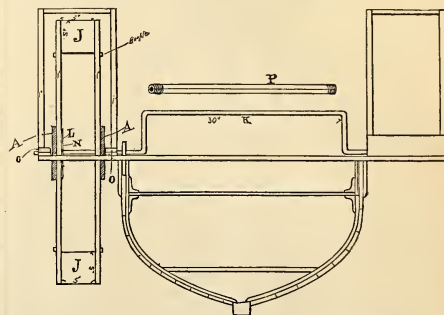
SHOWING ON THE LEFT-HAND SIDE A SECTION OF THE WHEEL IN PADDLE-BOX, AND ON THE OTHER SIDE THE PADDLE-BOX WITHOUT A WHEEL; THE WHOLE IN POSITION ON THE BOAT.
